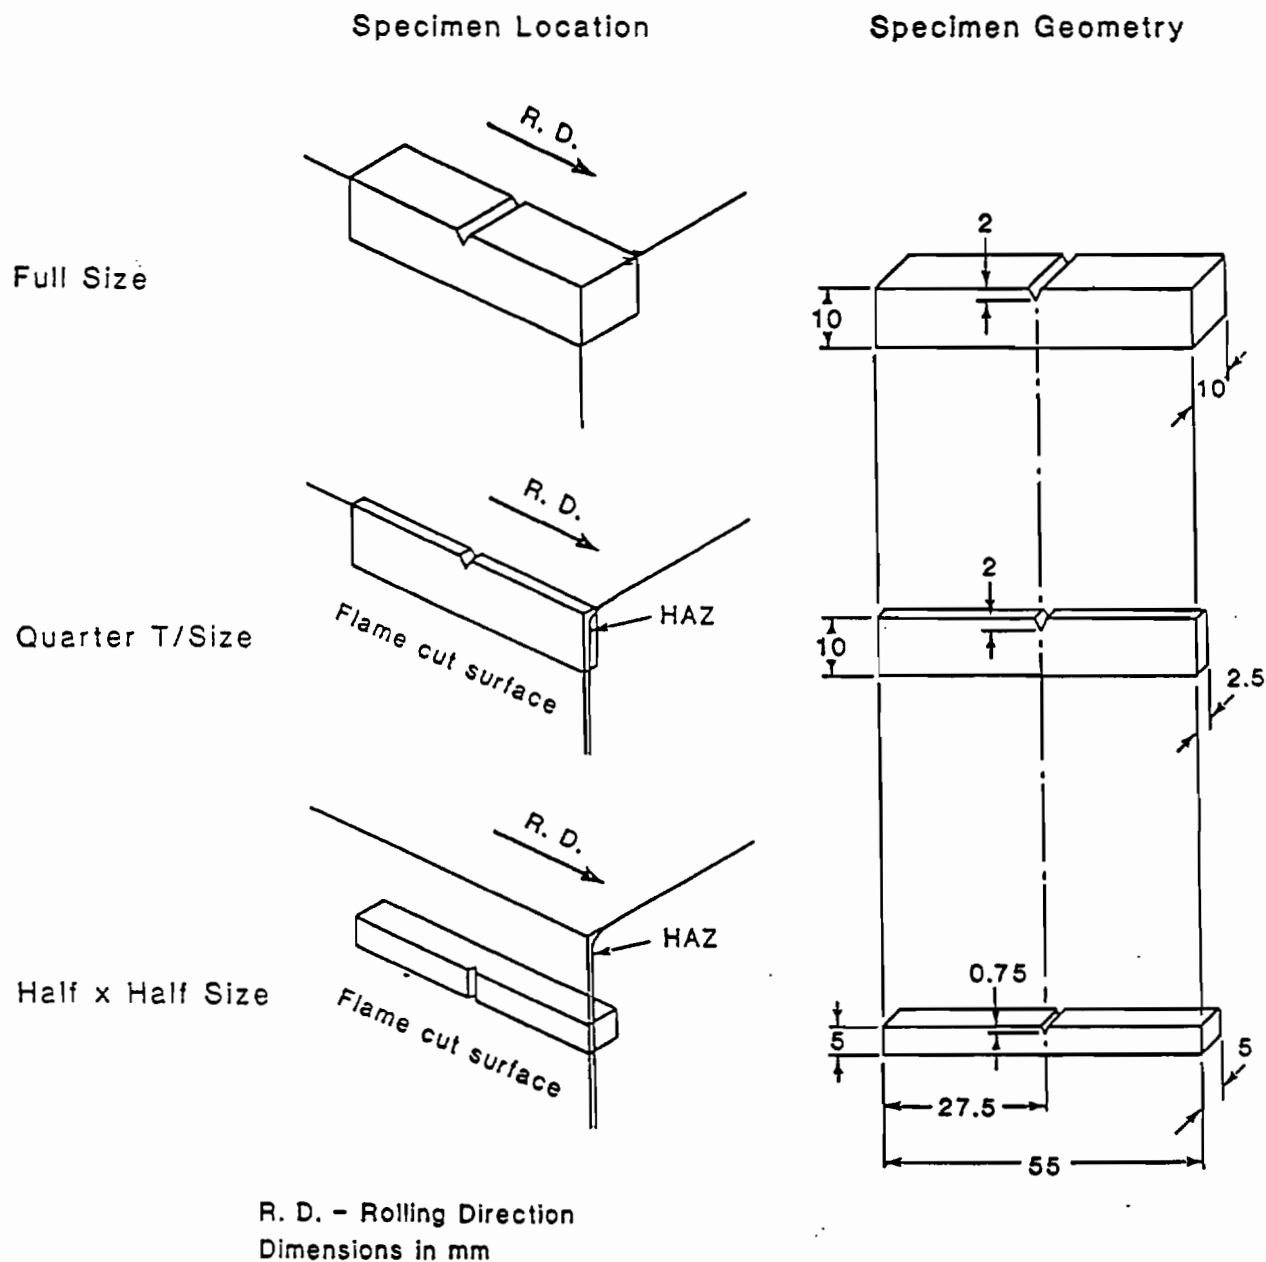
Charpy V-notch (CVN) specimens' geometry and notch orientation.
